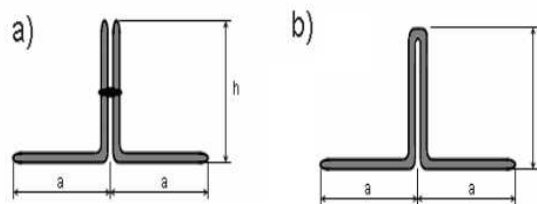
T-shaped spacers (a – welded from two L-shaped elements;
